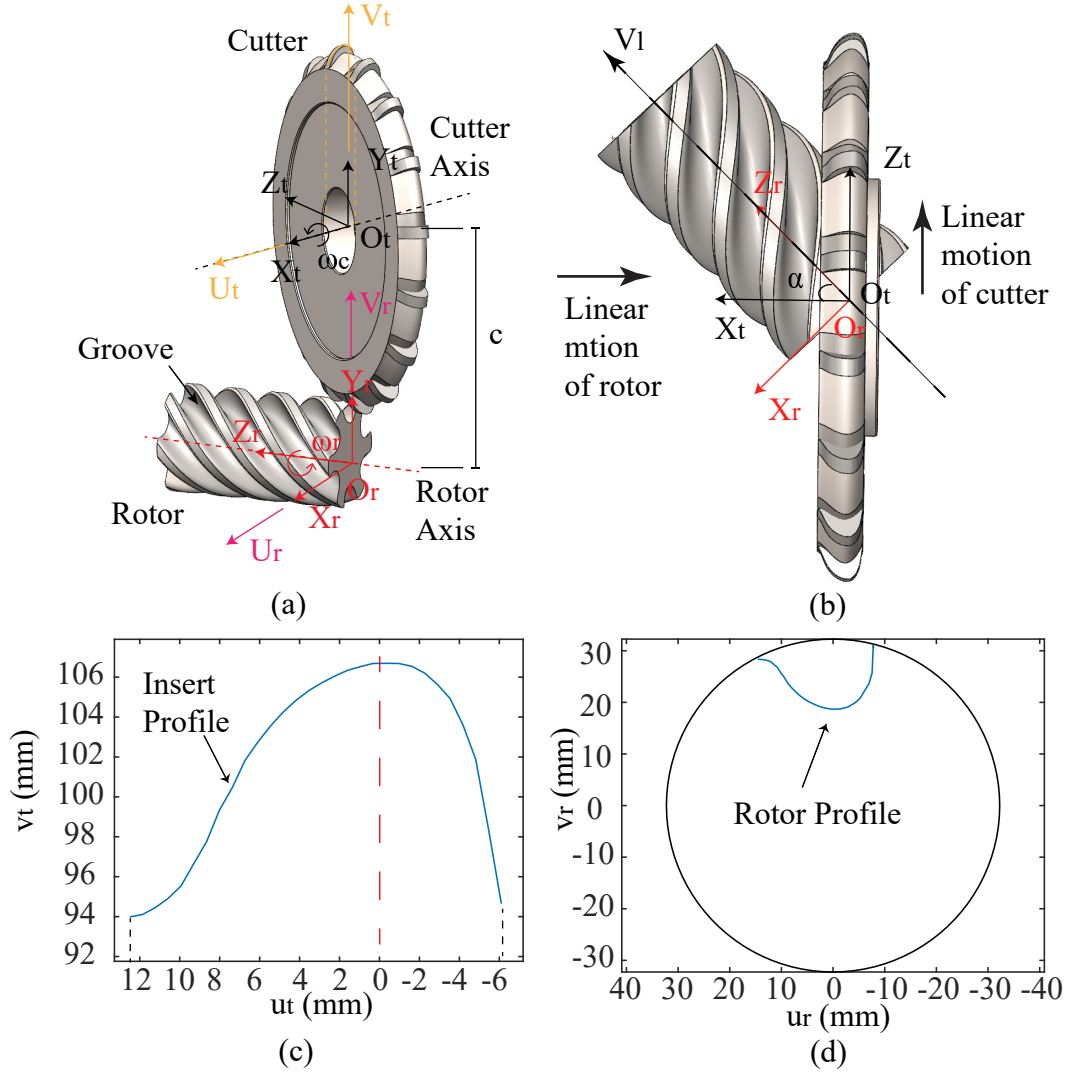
Screw milling setup. (a) tool and rotor frames, (b) relative motions of the tool and rotor, (c) tool profile, (d) rotor profile
